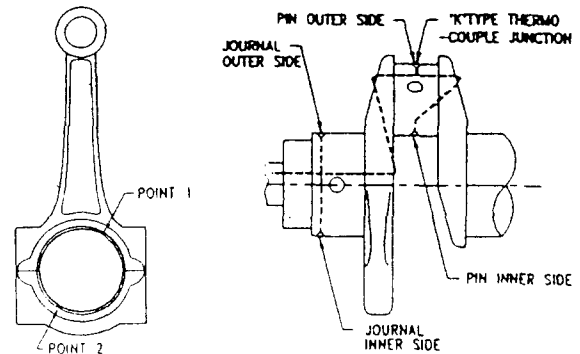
Locations of thermocouples at crank-pin and con-rod bearing
